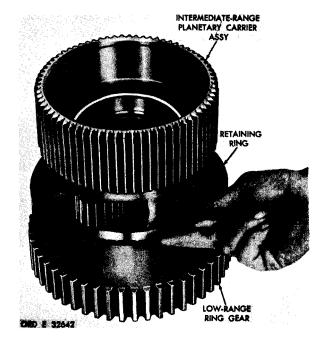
Removing (or installing) retaining ring that retains intermediate-range planetary carrier assembly
